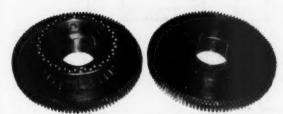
Two turbine discs machined on a Monarch lathe with constant cutting speed show the uniform finish which is obtainable.
